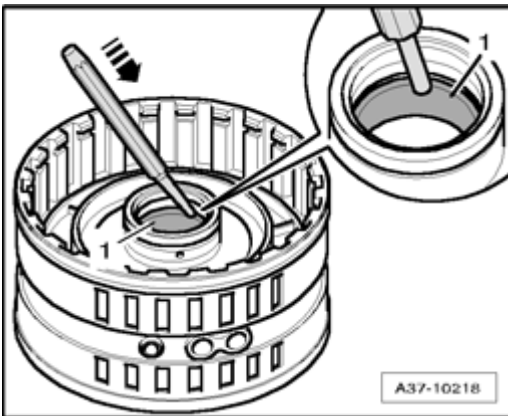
Striking On Bearing Sleeve To Drive Out Of Cylinder "D/E"
